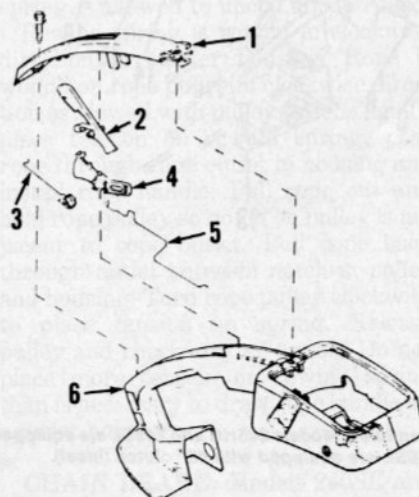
View of trigger assembly used on 240HG and 240SL models.
